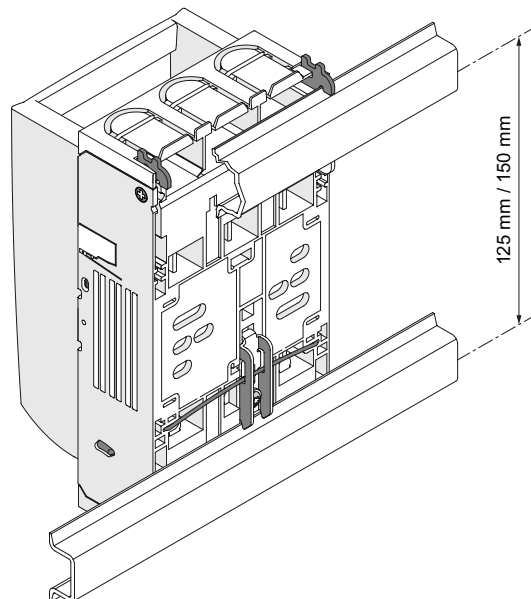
Mounting the fuse switch disconnecter, sizes 00 and 1 onto a standard rail (2)
